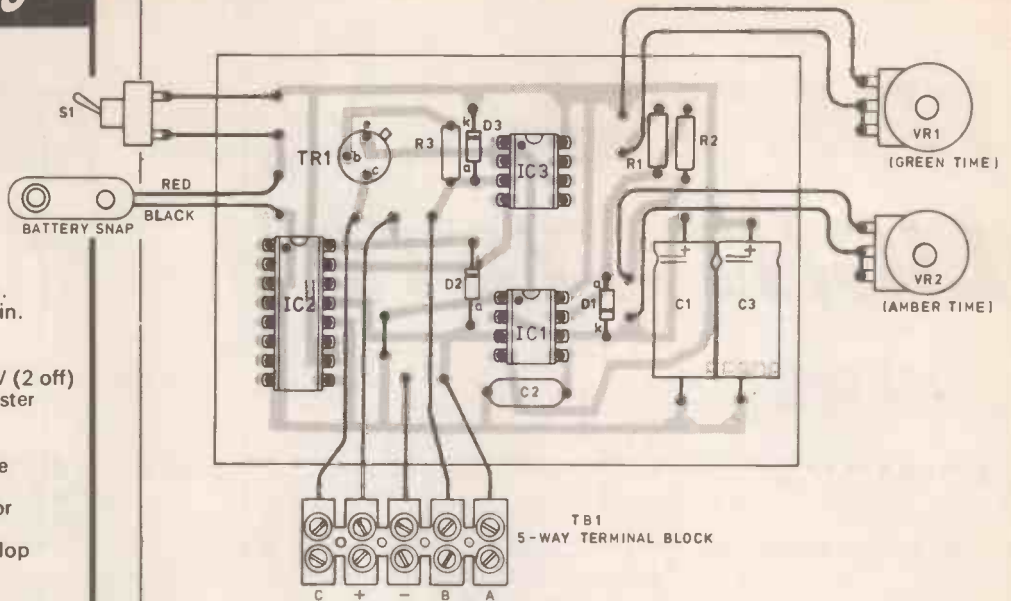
Printed circuit board component layout, interwiring to board and full size copper foil master pattern.
